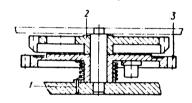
Gear of magazine drive: 1 - return spring 8.385.020; 2 - gear 8.416.006; 3 - rewinding mechanism 6.066.002
